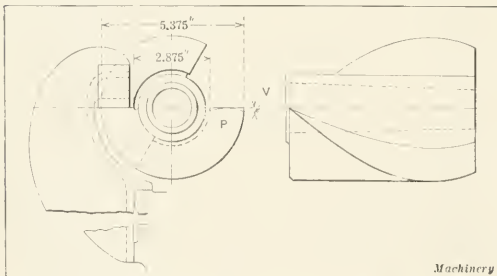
End and Side Elevation of a Guide for machining Helical Surfaces
